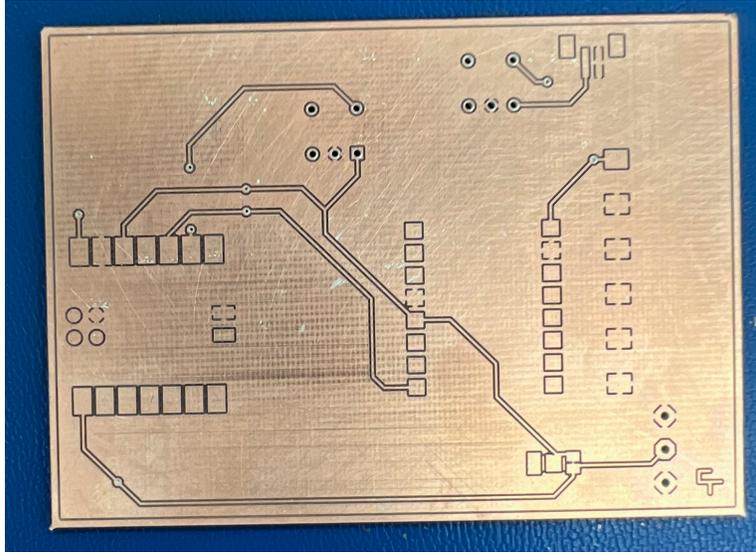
Receiver 1.0 In-House PCB Fabrication
